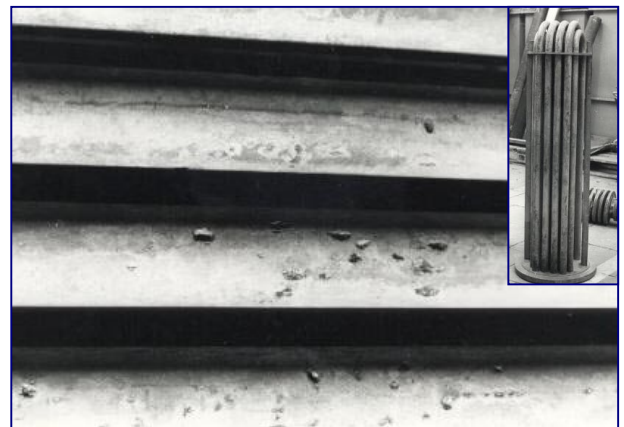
Pitting in X3CrNiMoN17-13-5 heating spiral of separator in a MVC recycling section of a PVC plant
